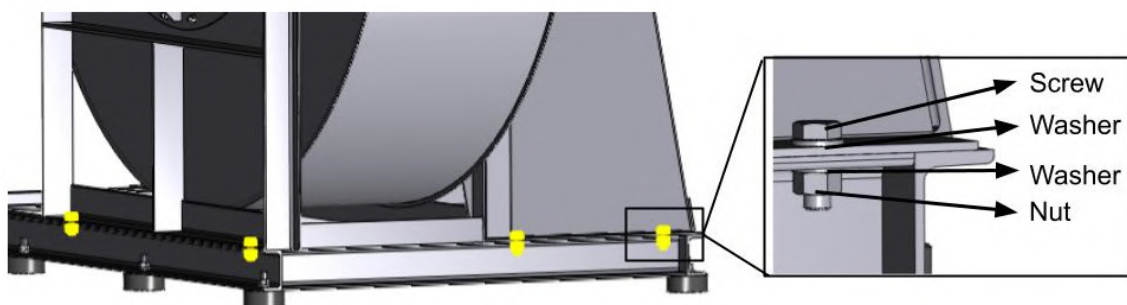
CAD model of a fan assembly and summary of the identified fastening sets.
